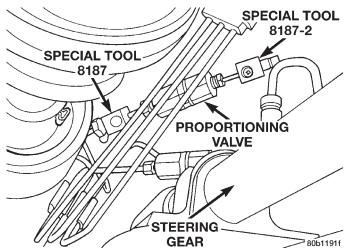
Proportioning Valve With Pressure Test Fittings Installed
